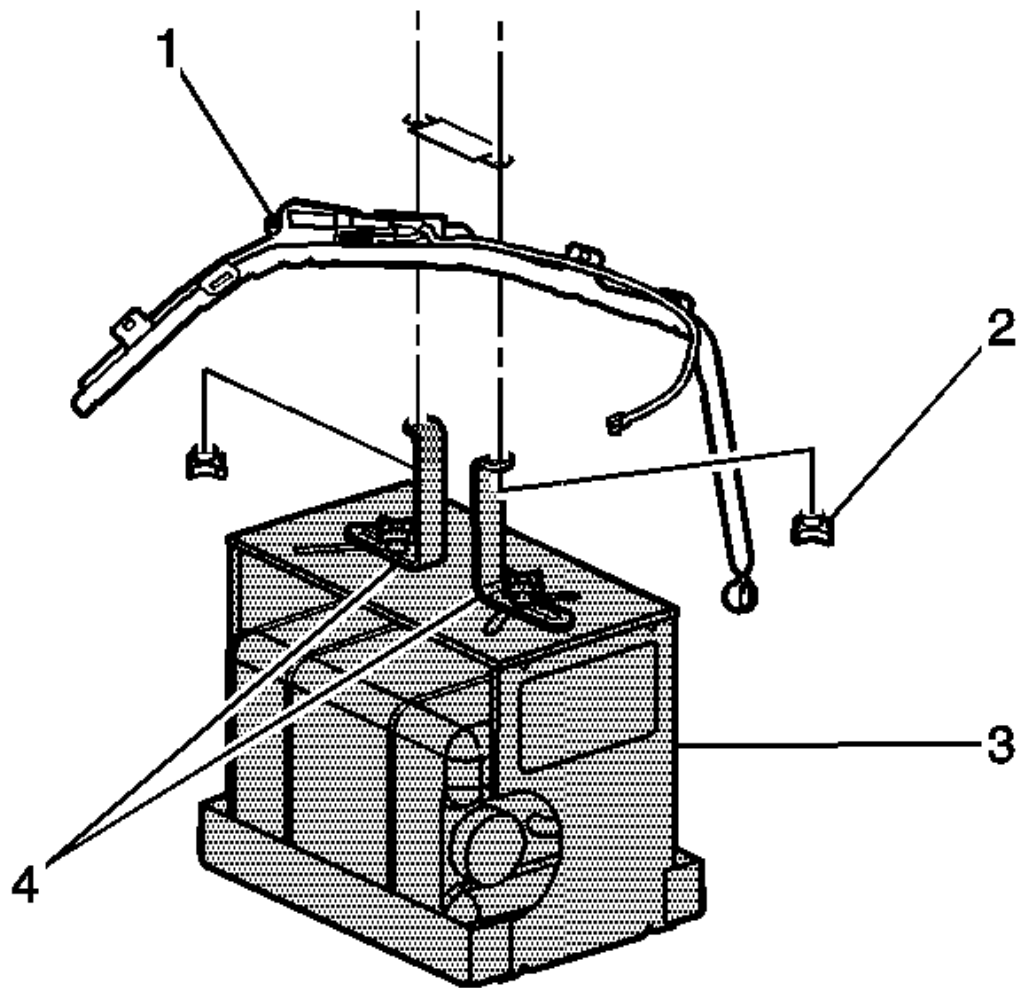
Identifying Fasteners Holding Side Impact Module To Deployment Fixture
